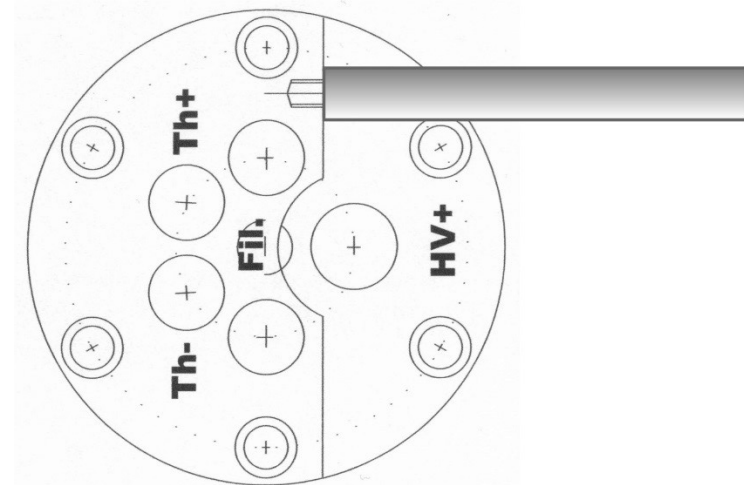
A rod with M4 screw helps mounting on a UHV chamber
